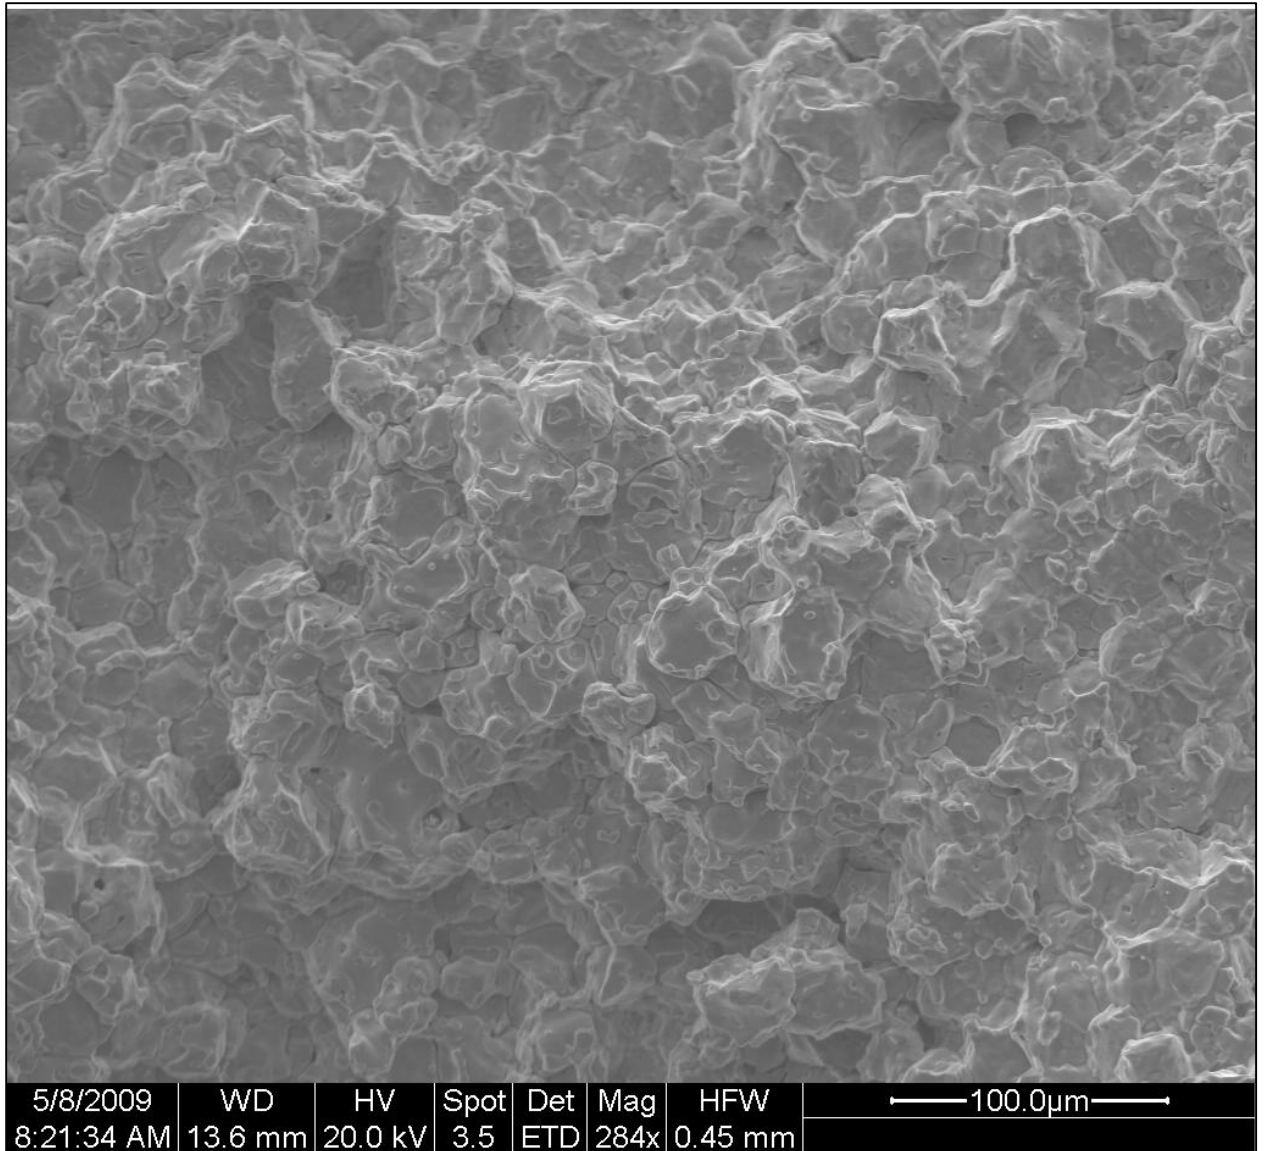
Inconel 718 on-cooling 2130°F fracture surface. Appearance is similar to the highest temp on-heating sample, 2188°F.
